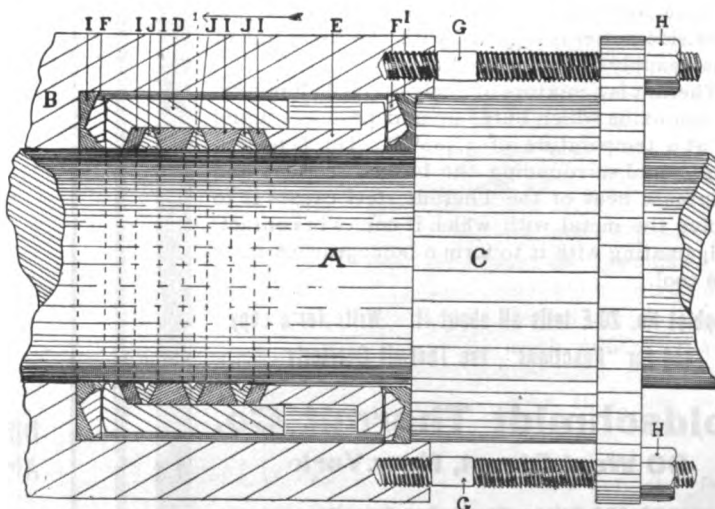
SECTIONAL VIEW OF NEW ERA PACKING CONTAINER.
